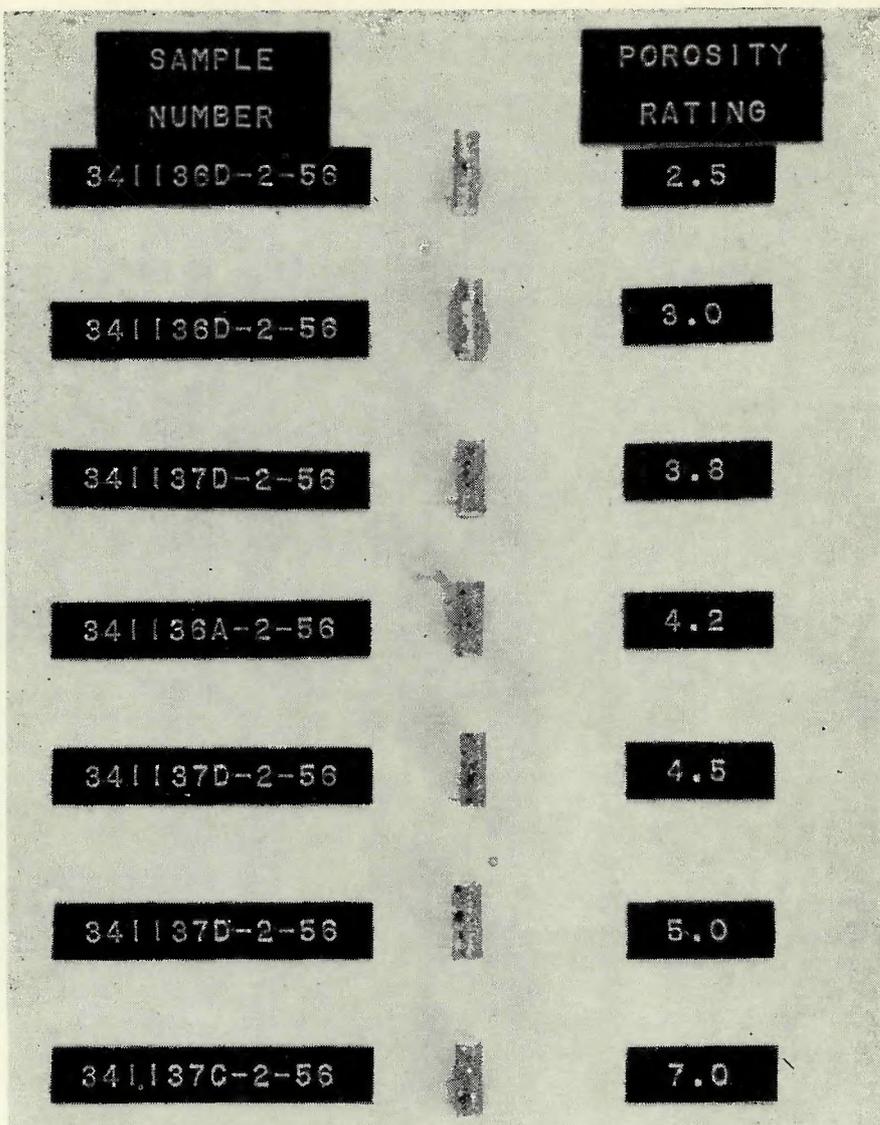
Porosity ratings of groove welds in some 6005-T5 and 6351-T5E37 extrusions; 5356 filler metal/gas tungsten-arc method
